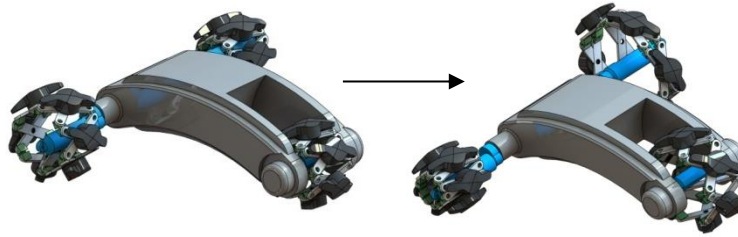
The complete mobile robot structure with adaptable wheel geometry
